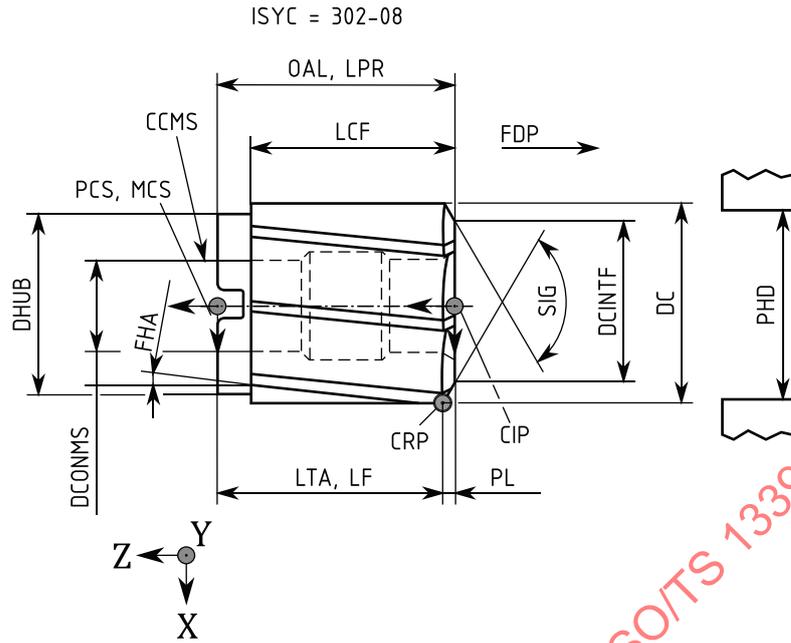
ISYC 302-08 - Core drill top, non-centre cutting, solid
